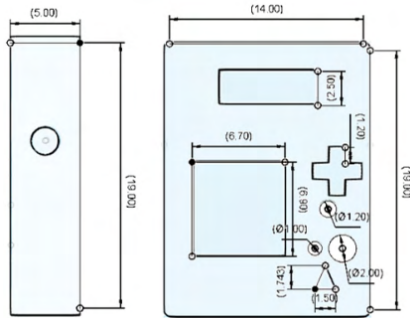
2D model of the prototype and dimensions: lateral and frontal perspective.
